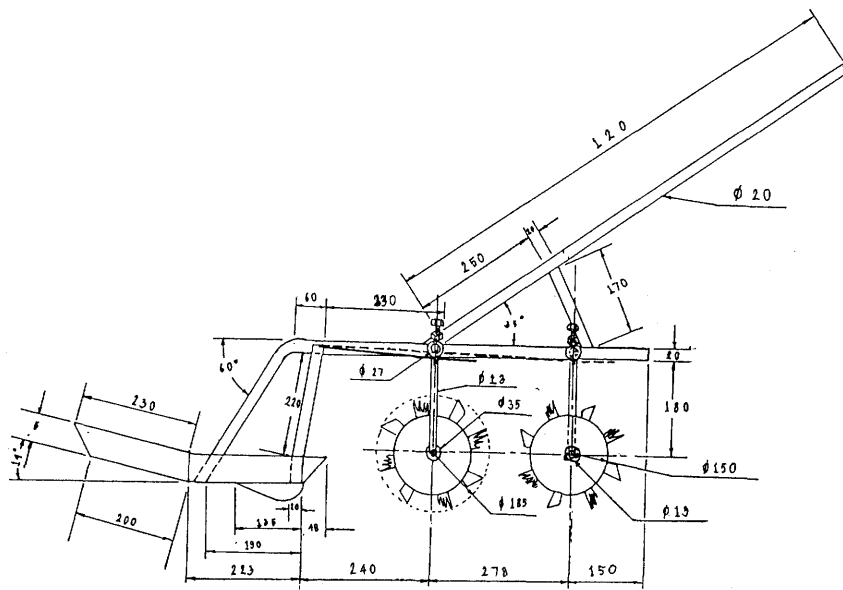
Side view of rotary weeder (scale 1 : 10, dimensions in millimeters).
